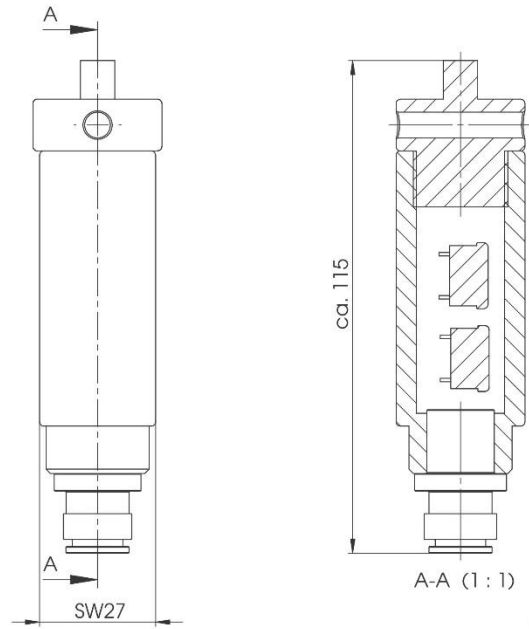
Sectional view KTSiO-XX and KTSiS-XX
